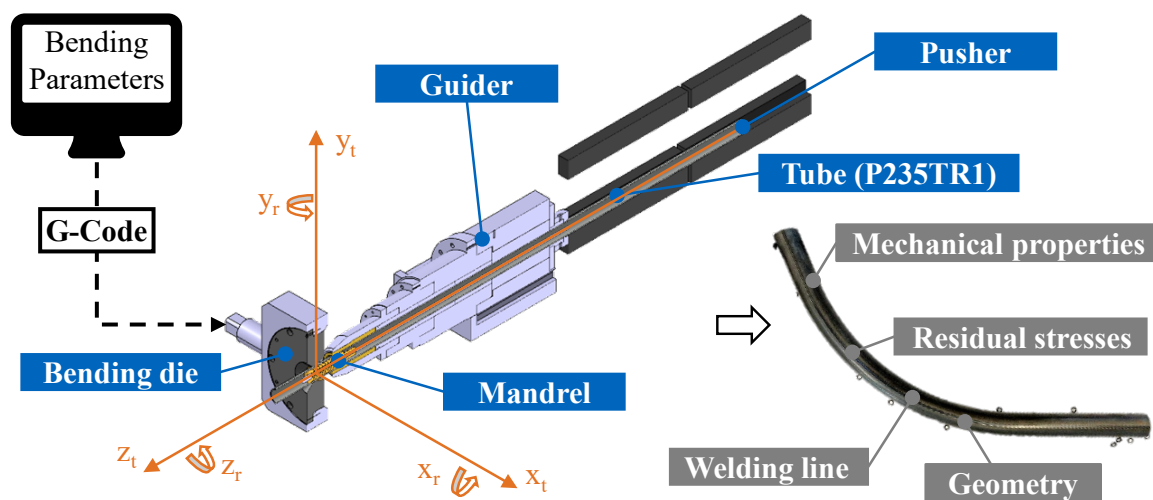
Principal of freeform bending with movable die and the resulting bent part [1].
